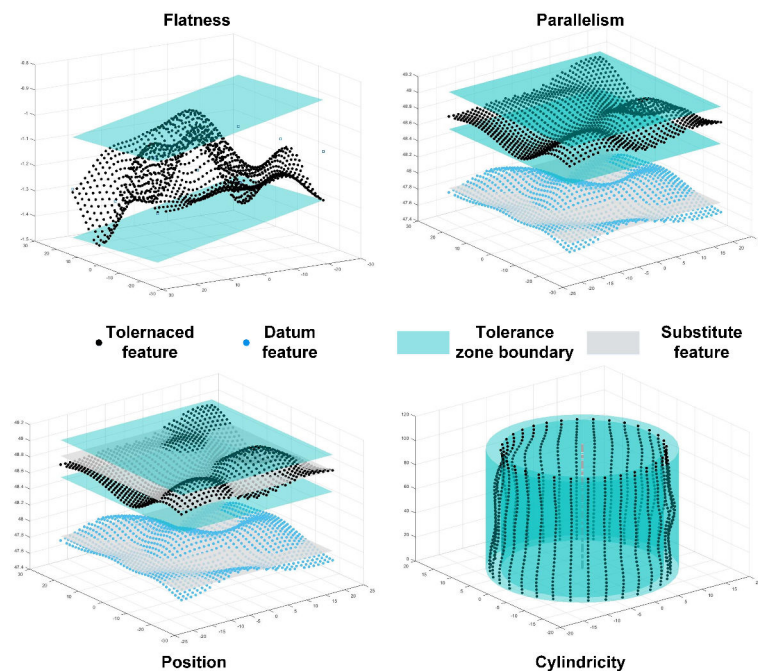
Evaluation of tolerance zone for four types of tolerances
